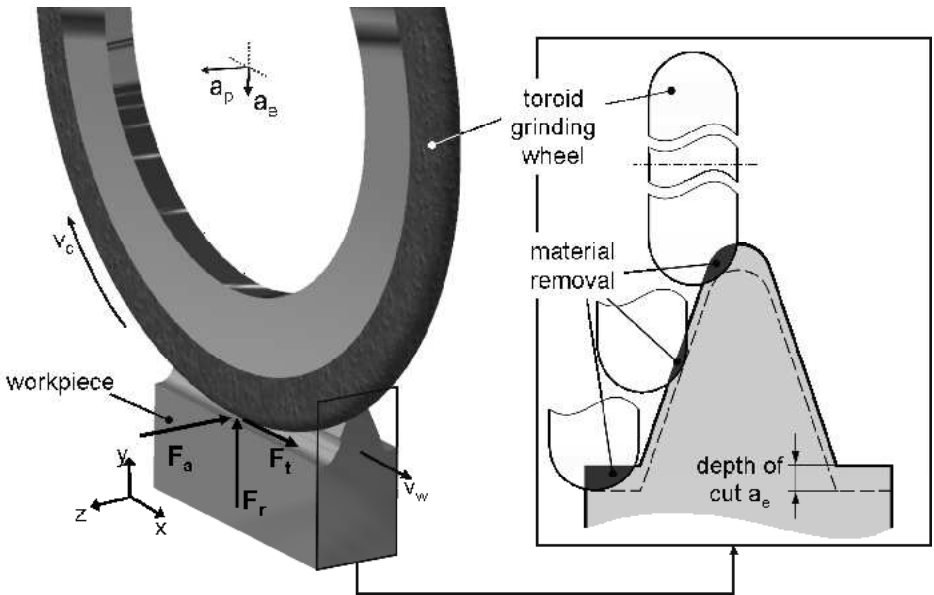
Schematic overview of the engagement of the grinding wheel
